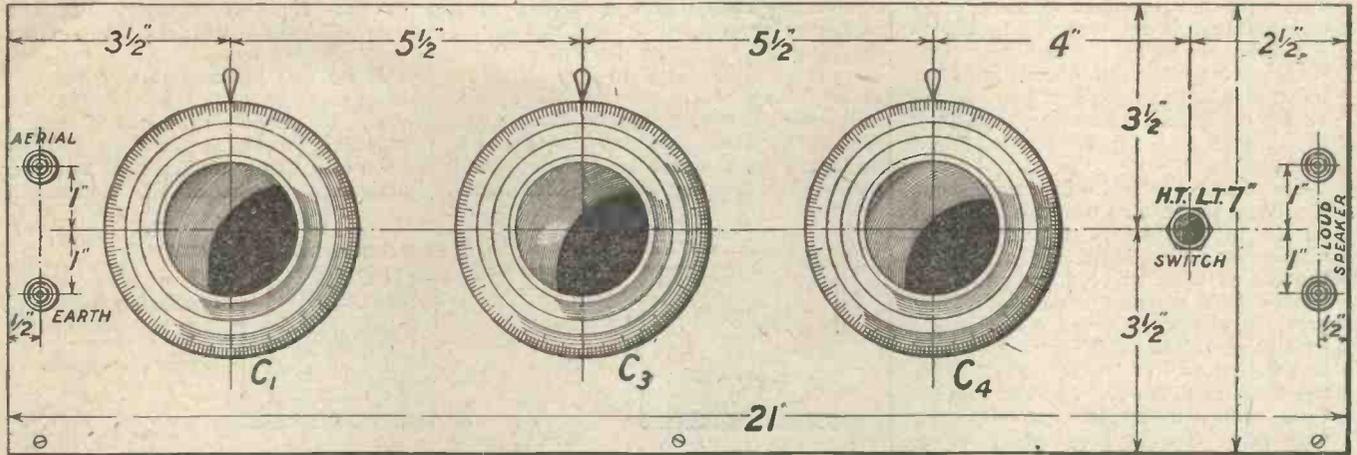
Drilling dimensions for the panel are given in this scale drawing. Blueprint No. C1073A.
